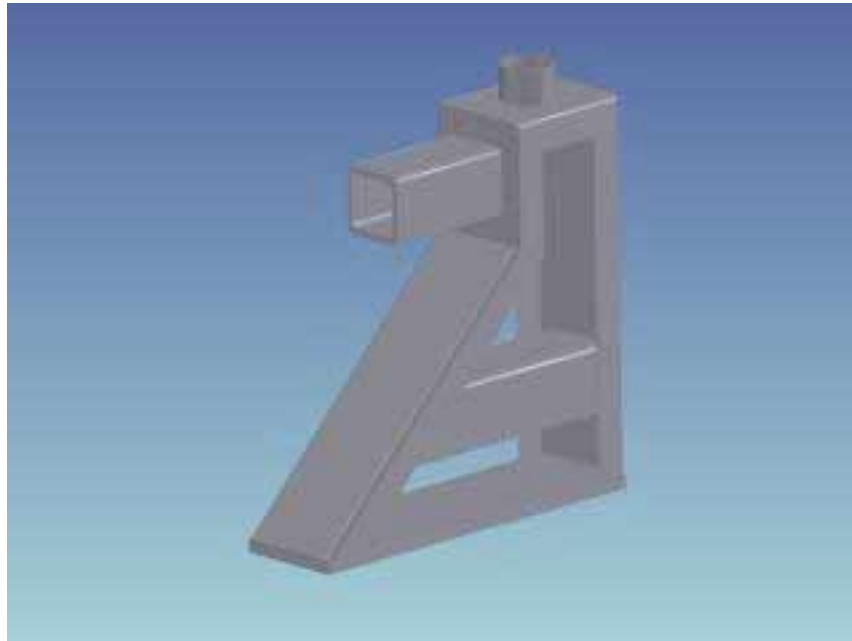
Model built of ASTM standard material for specifying welding symbology.
